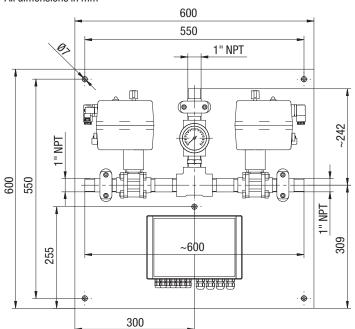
Dimensioned drawing C 7520 on mounting plate
